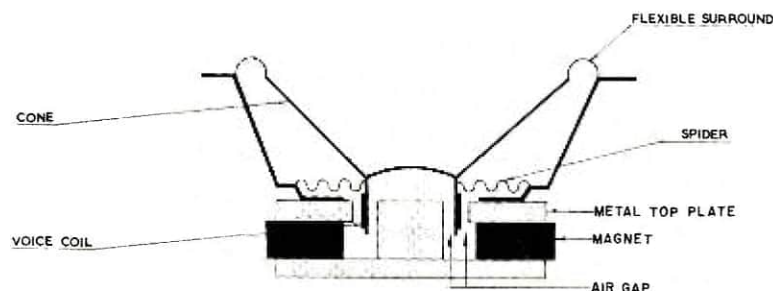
Cross section of a typical loudspeaker drive unit with voice coil sitting in air gap.
